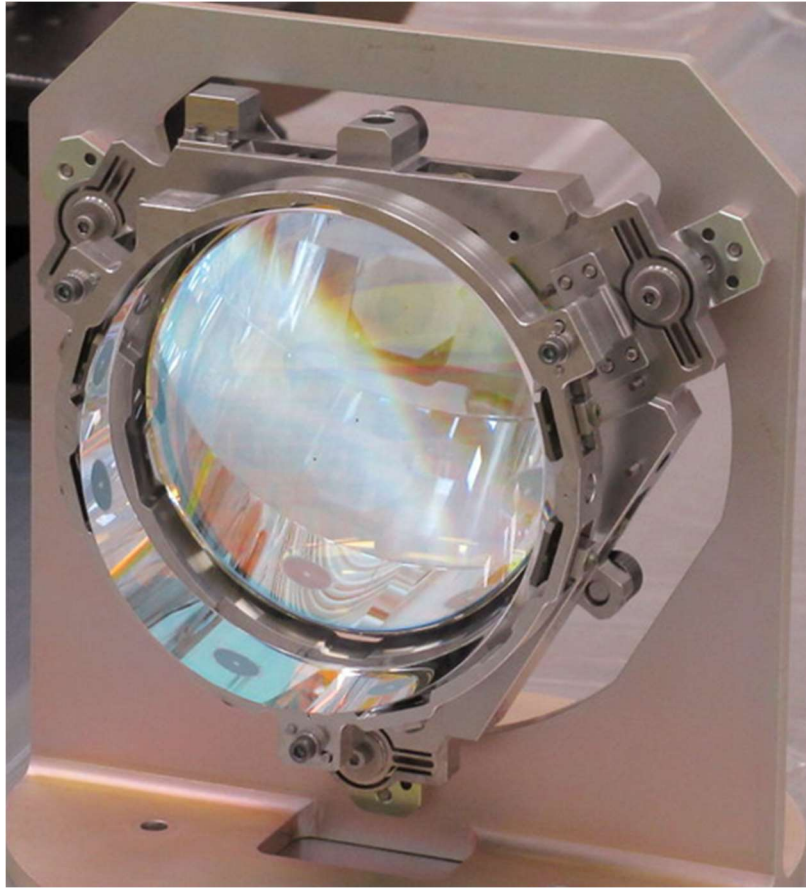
The completed Prism Assembly shown in its T-stand which was used during handling.
